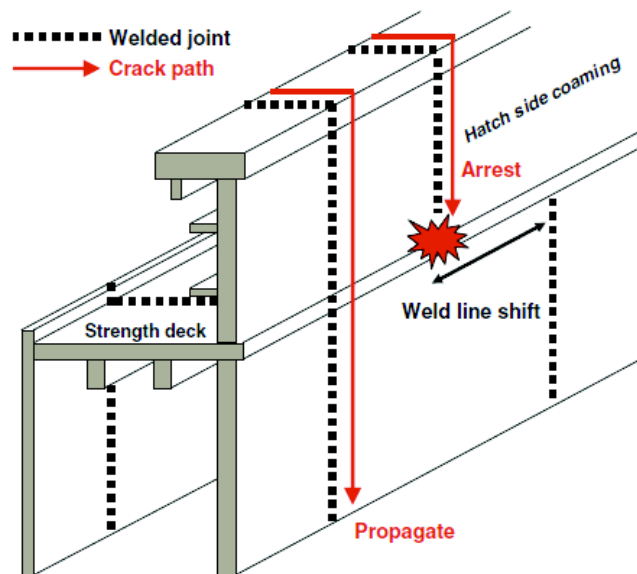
Concept of weld line shift (Sumi et al., 2013).
